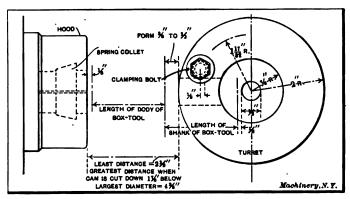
Method of Determining Length of Body and Shank of Box-tool
